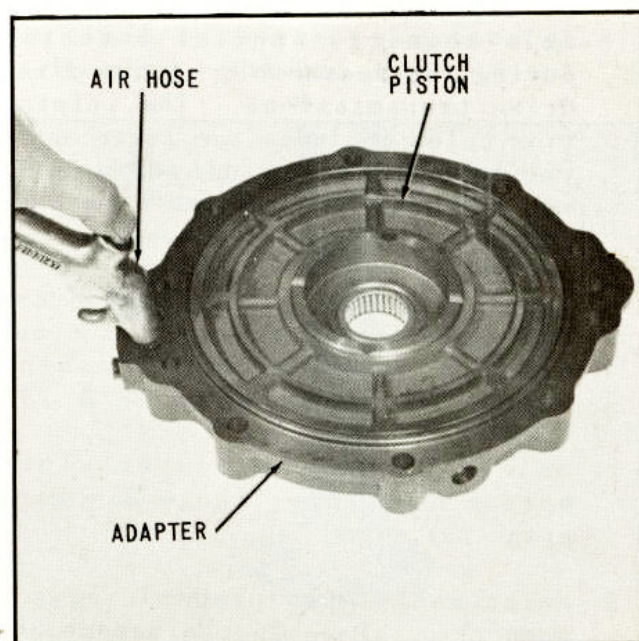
Disassembling Reverse Clutch Piston from Adapter
